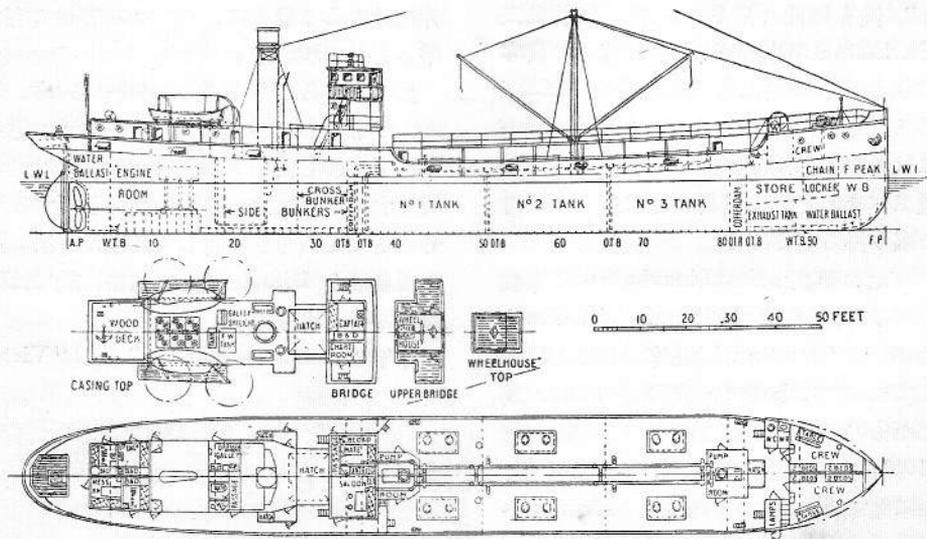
Oil tank vessel “Authority.” Engine fitted with Caprotti valve gear
